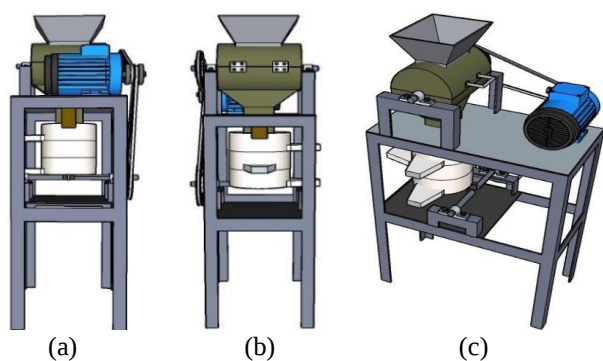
Perspective view (a) front view, (b) right side view, and (c) isometric view of the machine
